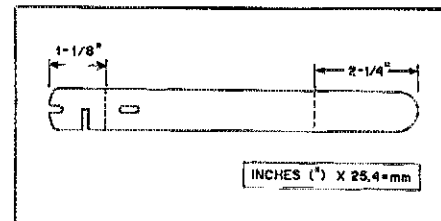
Dimensions for cutting the hacksaw blade. Grind teeth from blade.
